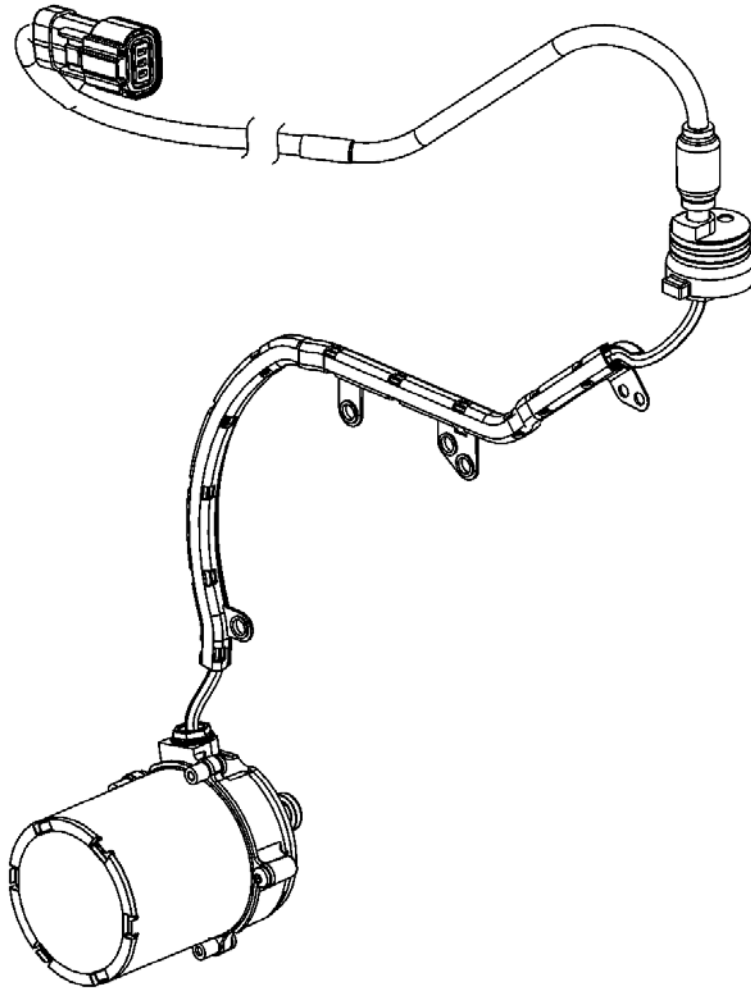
Electric Auxiliary Pump Drive Motor Assembly Components
